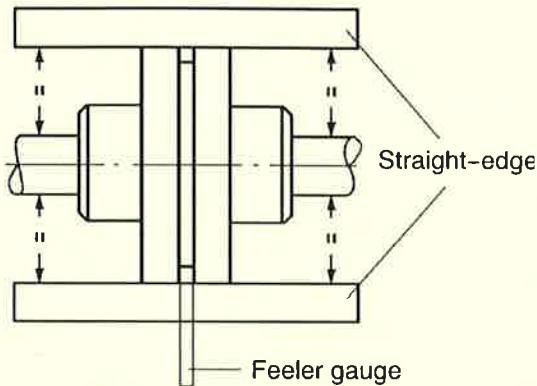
Alignment of the coupling with straight-edge and feeler gauge
